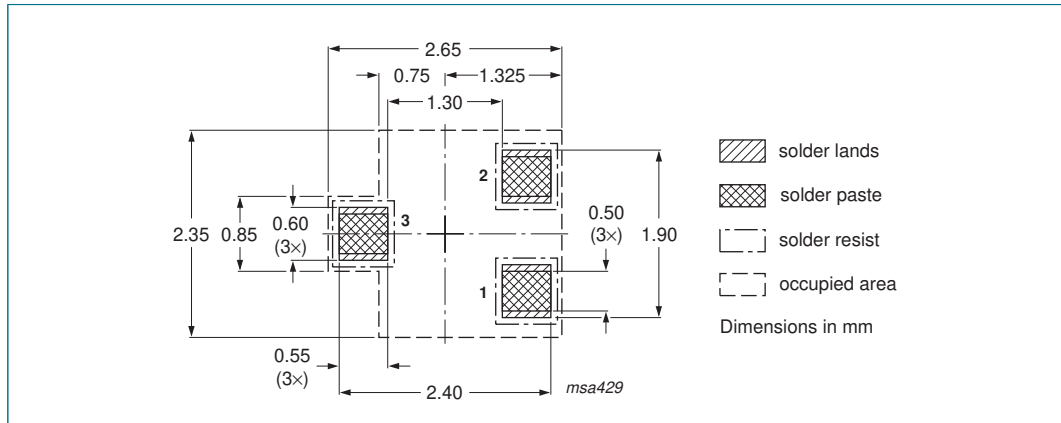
Reflow soldering footprint SOT323 (SC-70)
